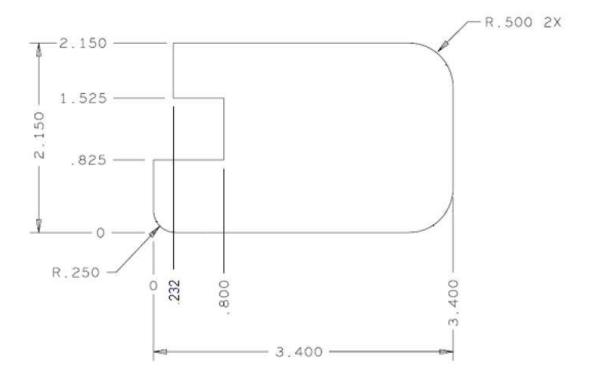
BeagleBone DVI-D Cape Dimensions Drawing
